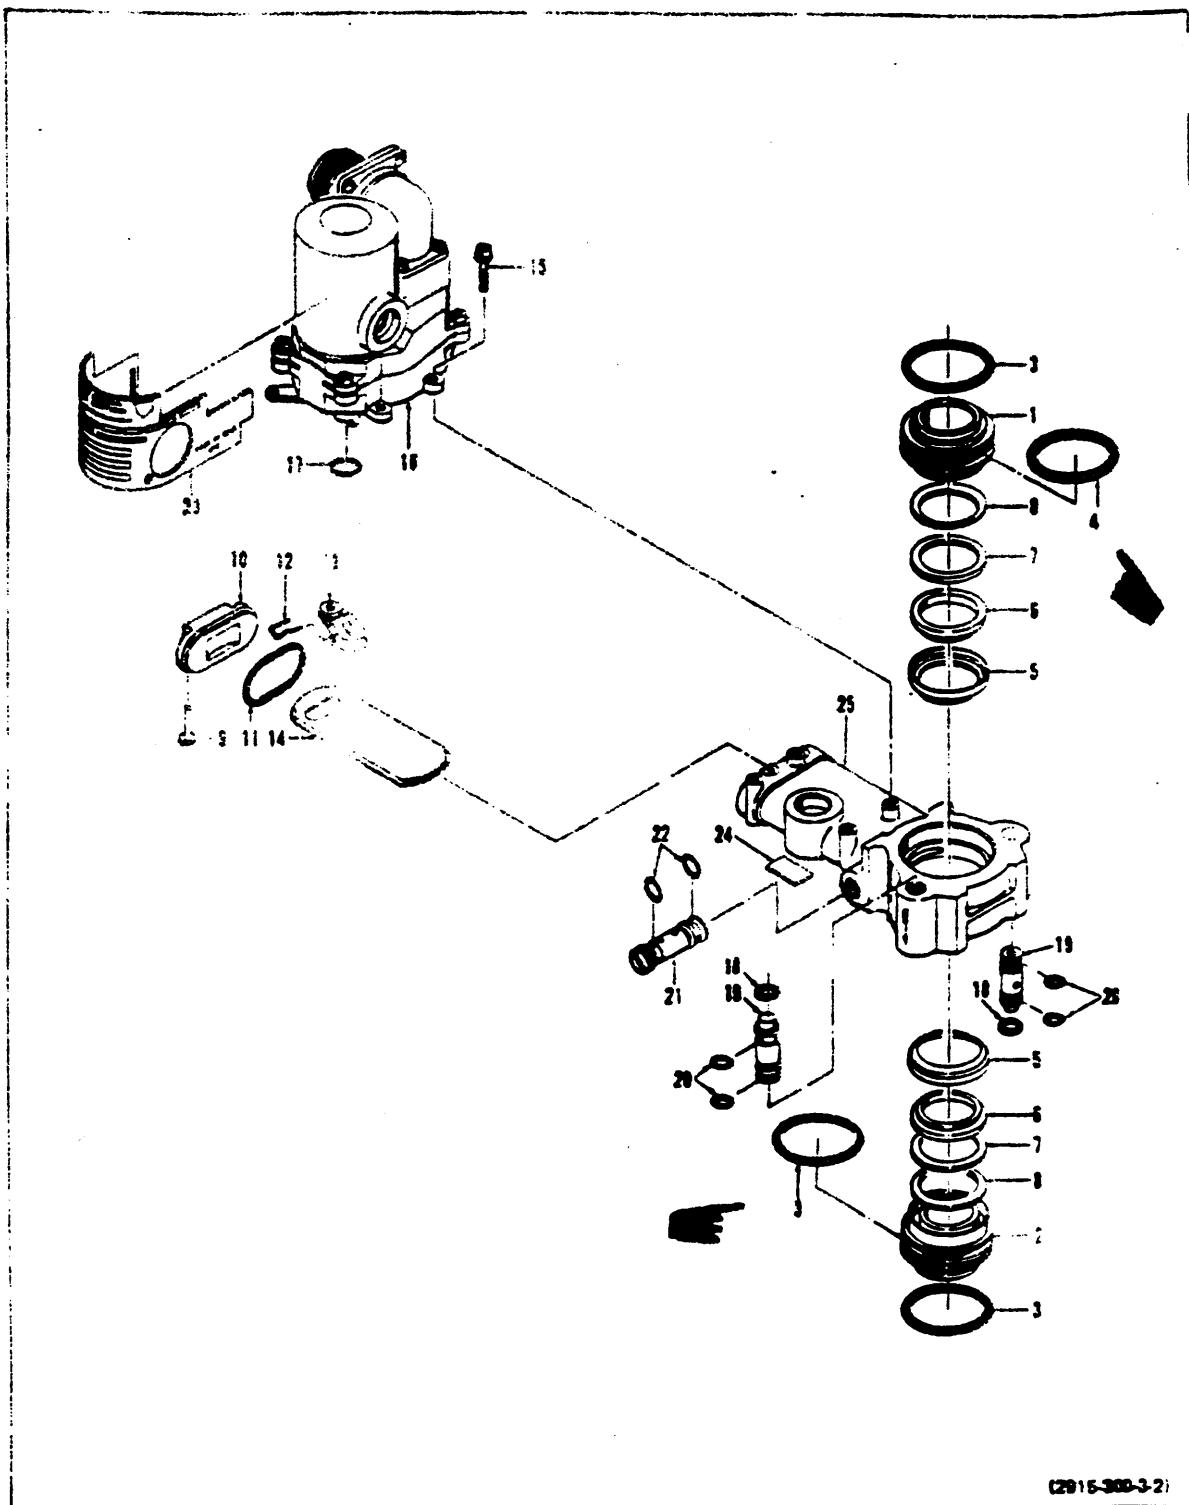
Gate Shut-off Valve Assembly, Part No. AV16B1667D
